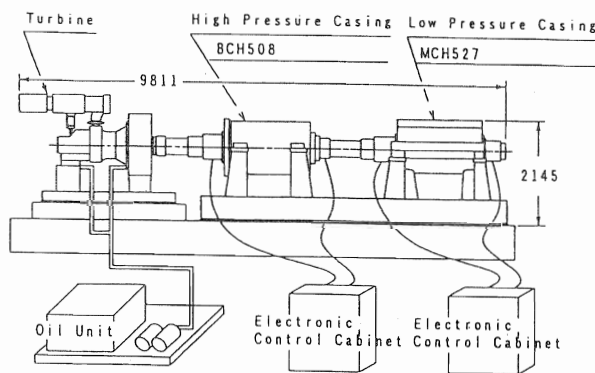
Arrangement of centrifugal Compressor with Magnetic Bearings
